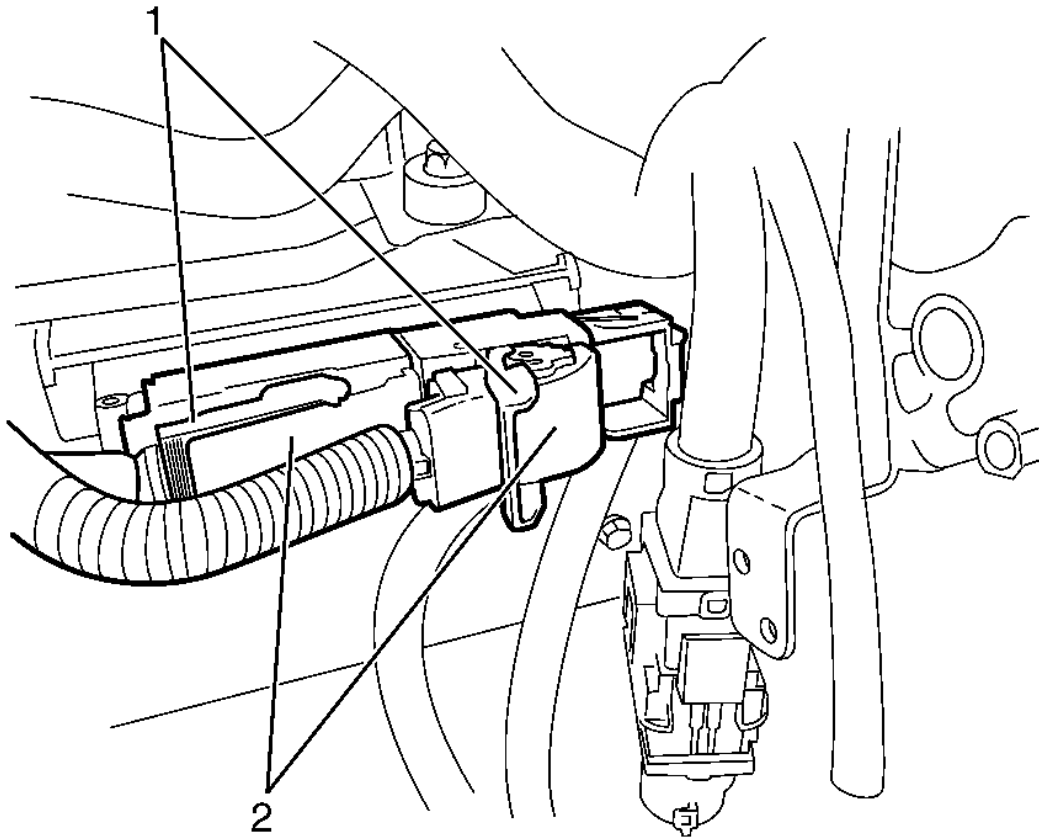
Identifying 56 & 2 Pin Engine Wiring Harness To Main Wiring Harness Electrical Connectors
